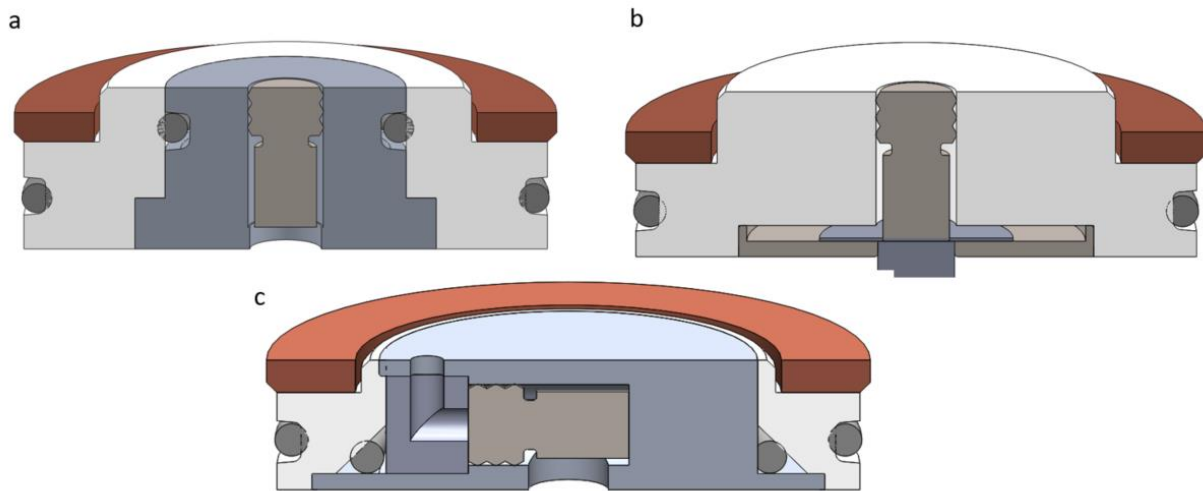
The cross-section view of one possible embodiment of the mechanical constructions of a cell cap.
